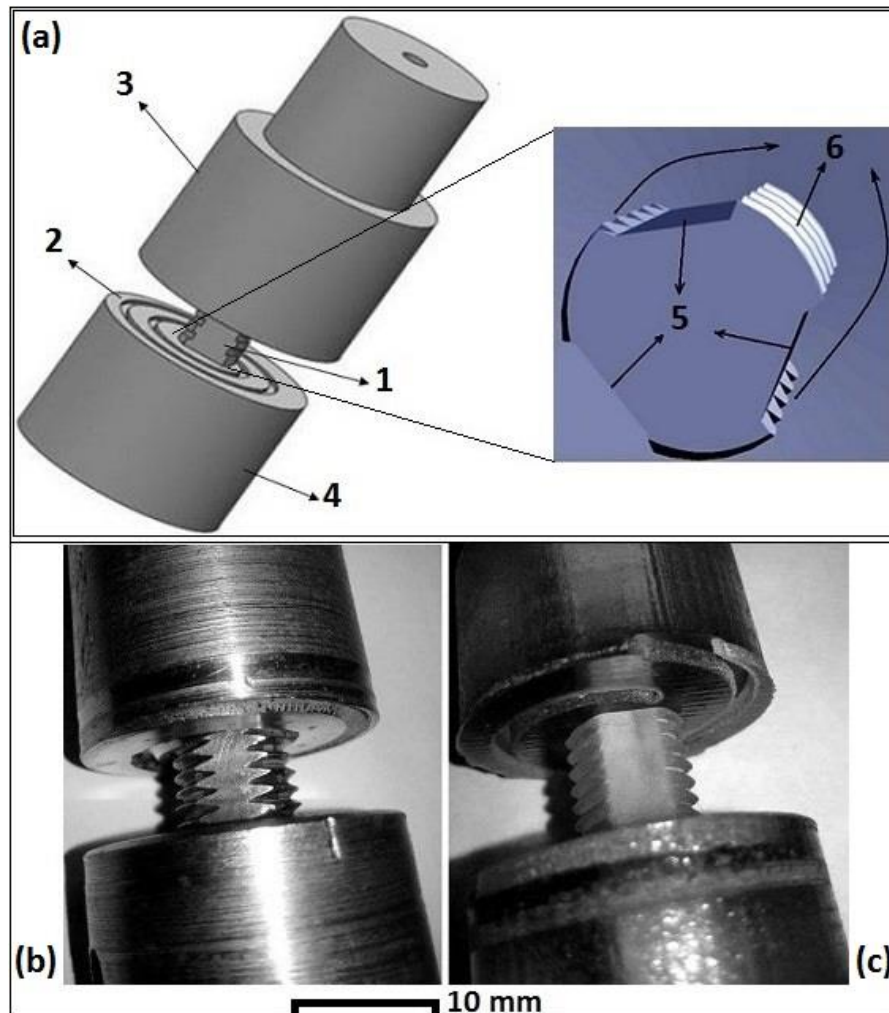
5. (a) 3D model of Bobbin Tool (Top); 1-Pin, 2-Scrolls, 3-Top Shoulder, 4-Bottom Shoulder, 5-Flats, 6-Threads. Actual Bobbin Tool (Bottom); (b) for H13 Bobbin Tool (Left) for Aluminium, (c) 3D printed Bobbin Tool (Right) for Plasticine samples (by A TAMADON).
